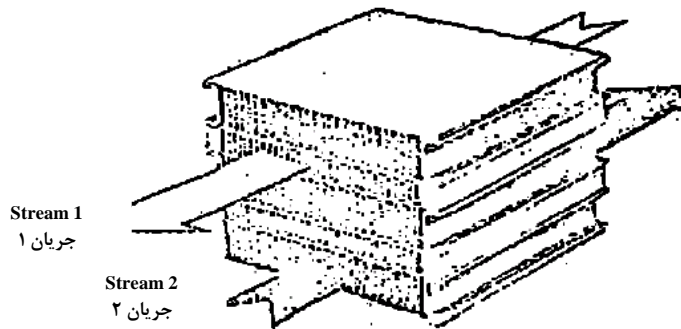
PLATE FIN EXCHANGER ASSEMBLY
